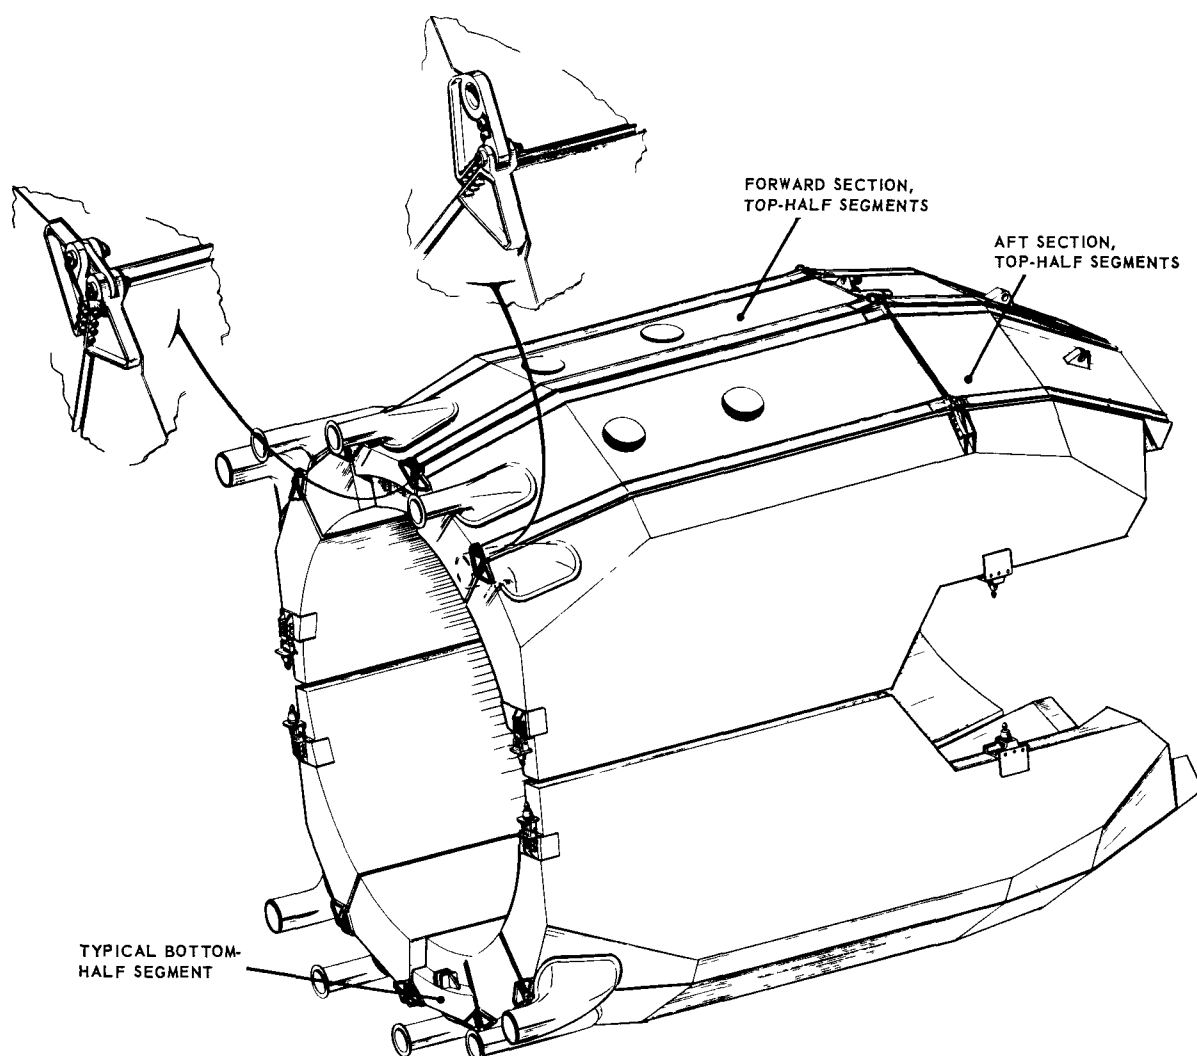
Cutaway view of XNJ140E-1 side shield assembly
